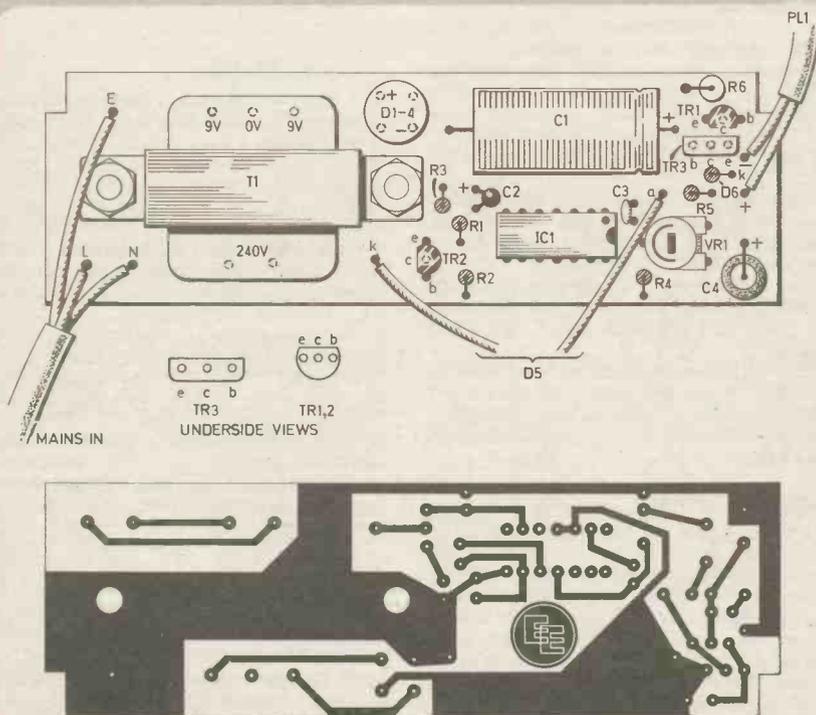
Actual size p.c.b. artwork and component layout. T1 mounting holes may require slight adjustment to suit individual transformers. The photograph shows the authors hand-held CB rig being charged by the prototype unit.
